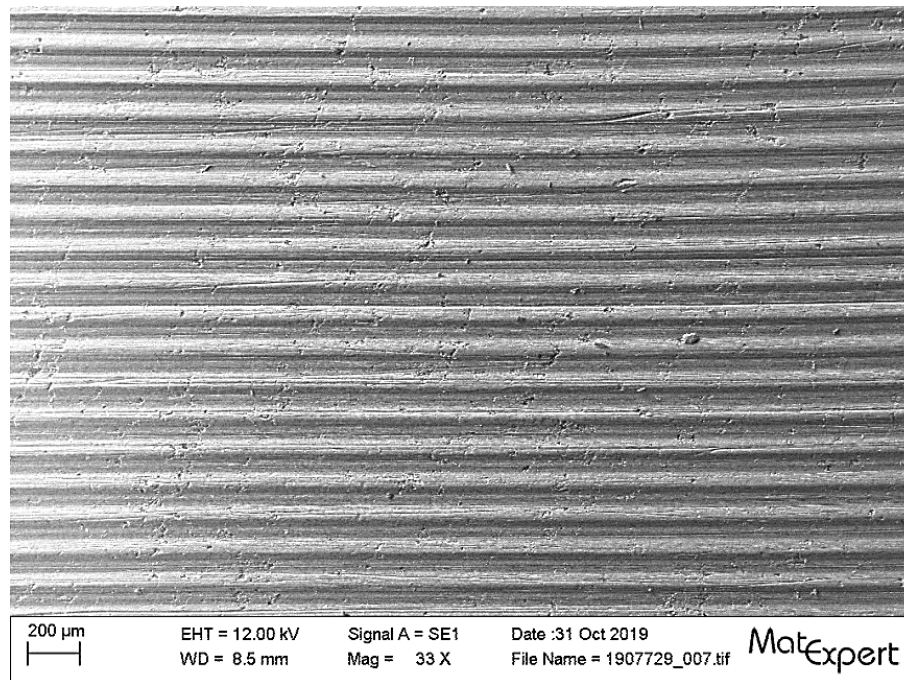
Centre engine mount, location 2 – shot-peened surface with cracks.
